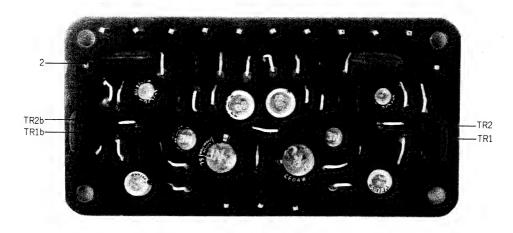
PHOTO OF MAIN AMP. P.C. BOARD (96-5008) BLOCK
